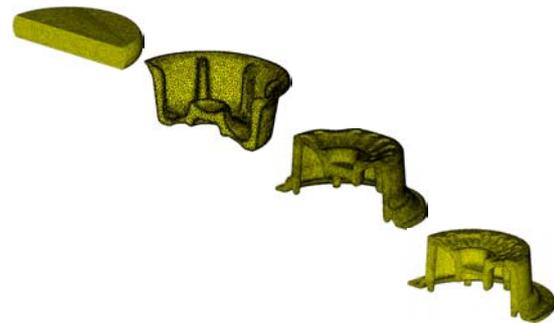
Aircraft landing gear wheel (Wheel diameter = 560 mm, Height = 216 mm; No of elements = 60,000), by ERC/NSM [12].
